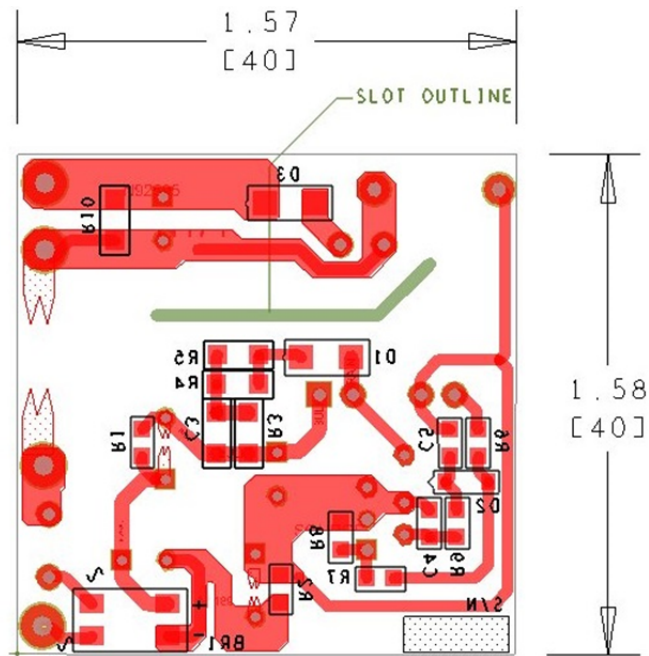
Printed Circuit Board Layout, Bottom Side.
